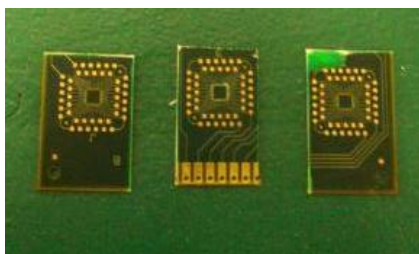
Pictures of assembled chip samples using solderable anisotropic conductive adhesives
